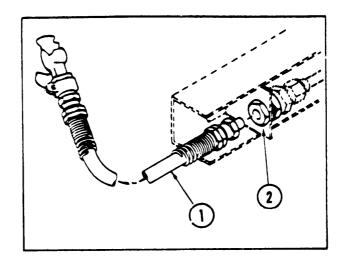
Trailer Air Hose Assembly (ARMY)
